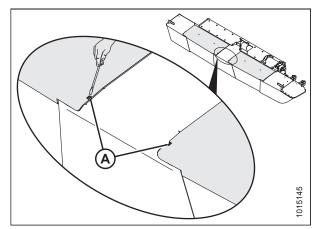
Cutterbar Door Latch Access Hole (Export Only)
